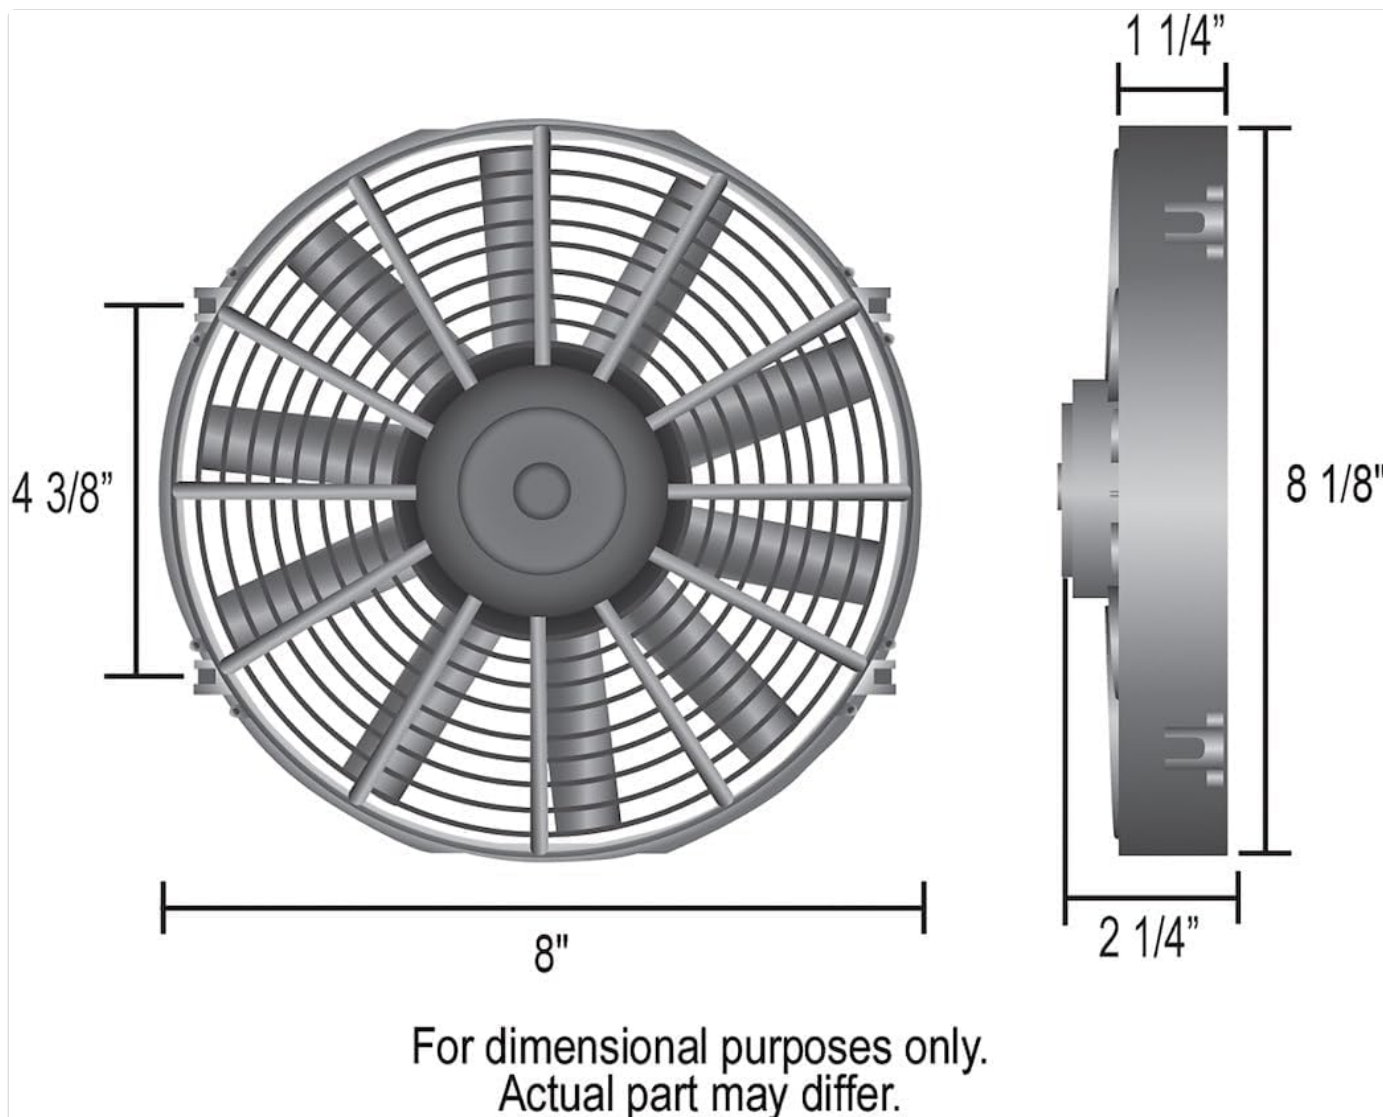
Dimensional drawing illustrating the fan's measurements, including an 8-inch diameter, 4 3/8-inch motor depth, 1 1/4-inch overall thickness, and 2 1/4-inch mounting depth.
